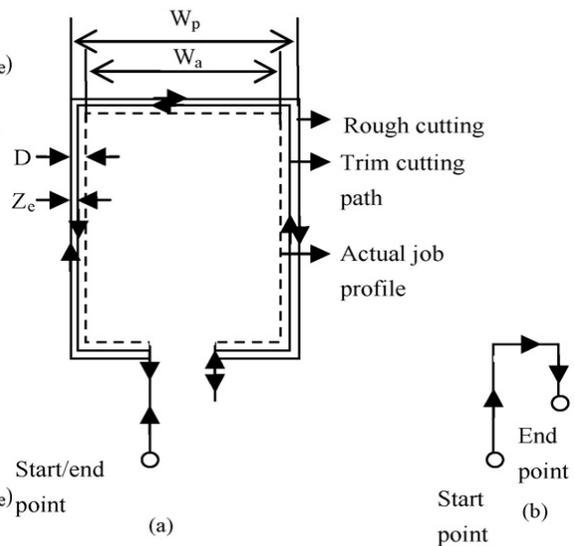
Wire paths planning for machining of test specimen in trim cutting followed by rough cutting
